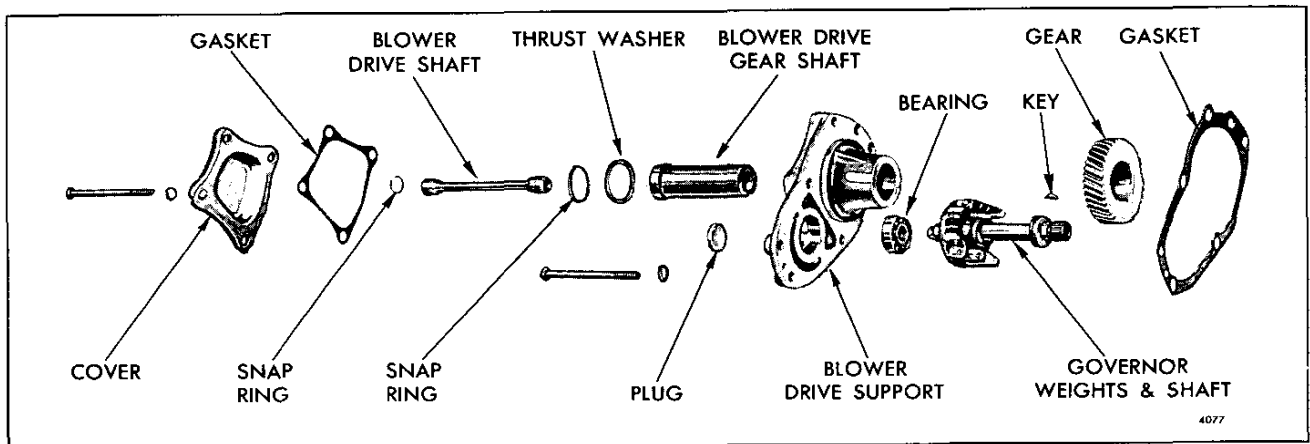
Blower Drive Support Details and Relative Location of Parts
